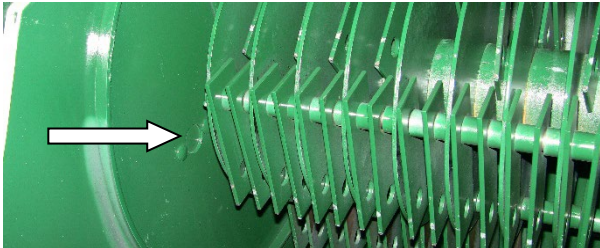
Hammer Removal Hole To Remove Hammer Mill Rods (Shields Removed For Clarity).
